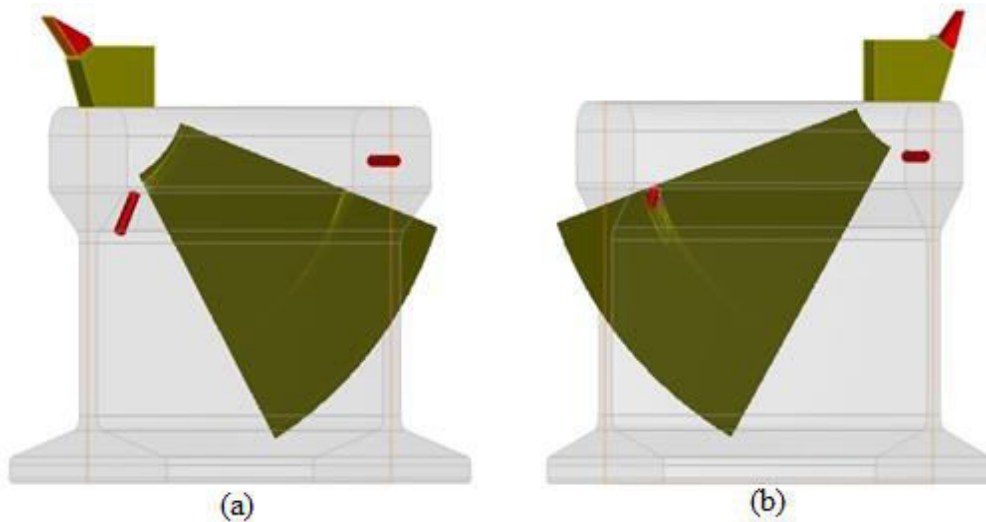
3D image view of the test sample while inspecting (a) defect-1 using PA1 (b) defect-2 using PA1
